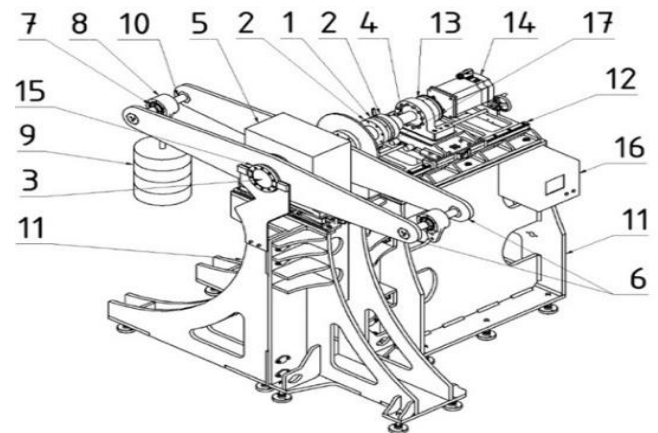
The basic elements of the equipment: 1 - force sensor; 2 - connecting accessories; 3, 4 - shaft; 5 - aerostatic bearing; 6 - test arm; 7 - secondary bearing; 8 - hinge; 9 - hanging weights; 10 - test arm pin; 11 - supporting two-part frame; 12 - linear guide; 13 - gearbox; 14 - drive; 15 - test arm rotation angle gauge; 16 - control unit; 17 - mechanical brake.
